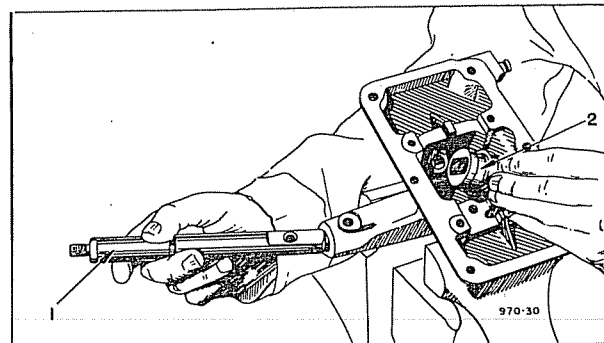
Removing Gearshift Lever Shaft and Lever.
